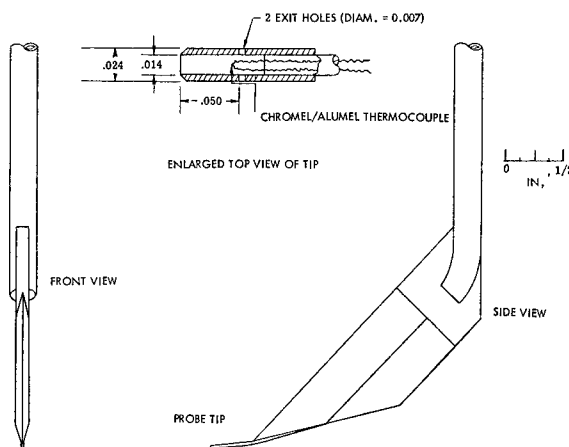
Miniature shielded-thermocouple probe, 24 mils diameter, developed at Langley Research Center for boundary layer studies in wind tunnels.
